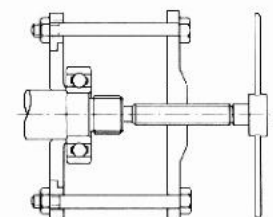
Removal of Inner Ring Using Withdrawal Tool(1)
